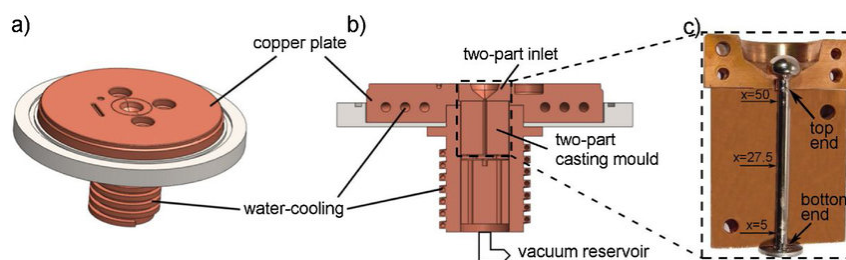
Diagram showing a suction casting set up with a water-cooled copper plate [44]. (a) Top view of copper plate; (b) section view of copper plate showing the water cooling system, the material inlet and the outlet where vacuum is applied; (c) section view of a cylindrical mold.
